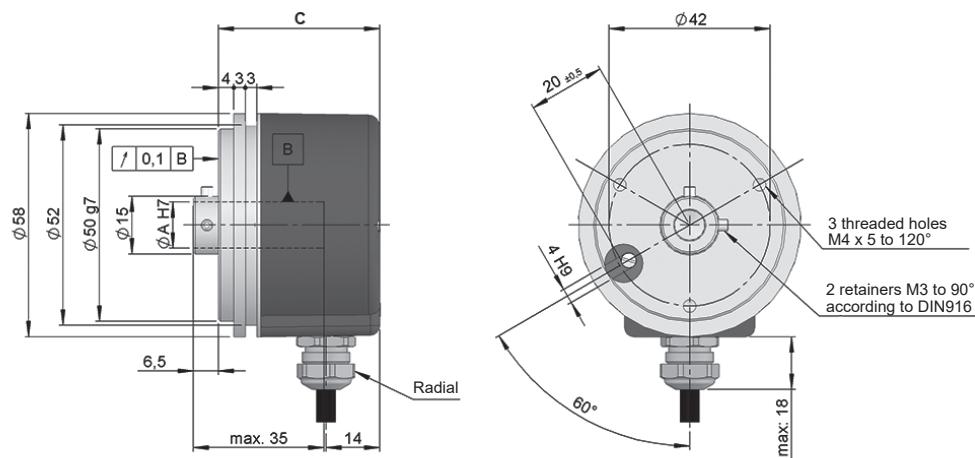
mechanical option type 1, blind hollow shaft type 5, connection type 3
